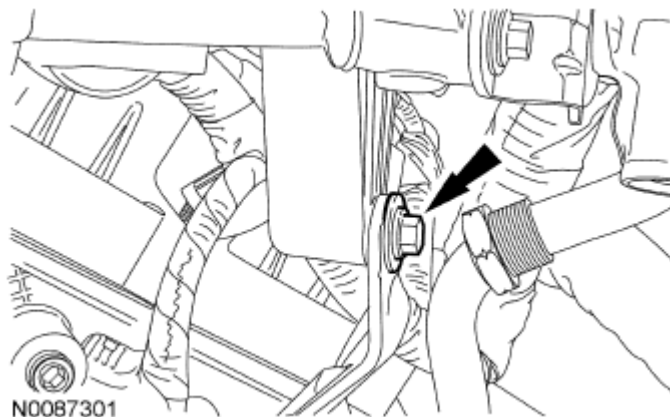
Locating Upper Intake Manifold Bracket Bolts
